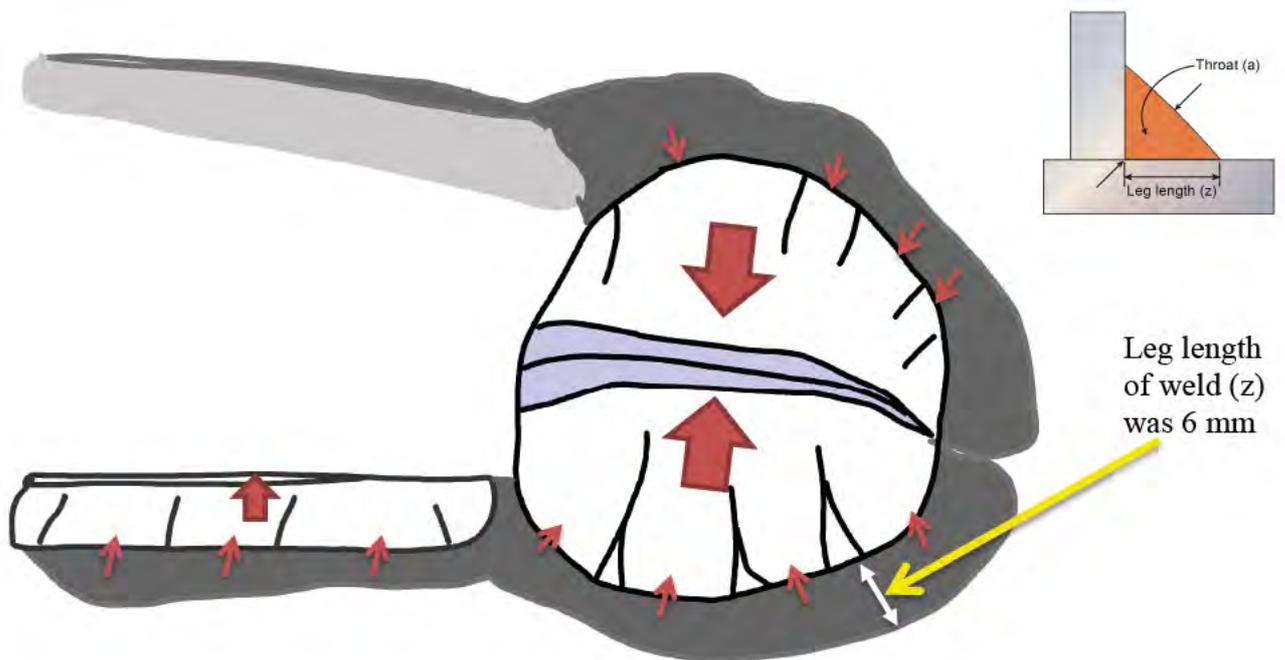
Schematic of Rod 1 fracture. Small red arrows highlight the multiple initiation points at the weld/rod interface. The large red arrow identify the general direction of fatigue crack growth. Note the loading was reverse bending as two fatigue fractures grew towards the centre of the rod. Overload area is shown in blue. The leg length of the weld (insert provides mitre fillet weld schematic) was measured to be 6mm.
